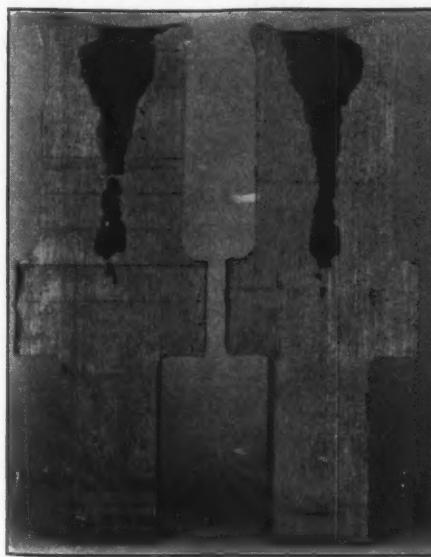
Test casting of Class B steel; carbon type pipe eliminator used. Shrinkage extends into casting. Weight of riser and casting, 28 lb.
